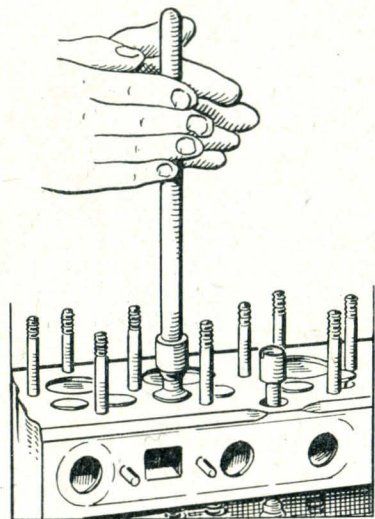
SHOWING THE SUCTION TYPE OF VALVE GRINDING TOOL IN OPERATION
